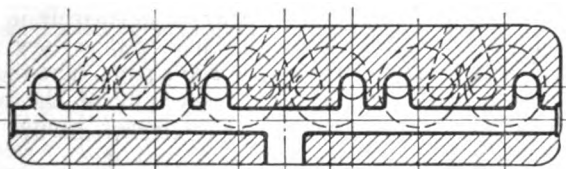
(above)—Section of cylinder head showing short cast-in intake manifold
